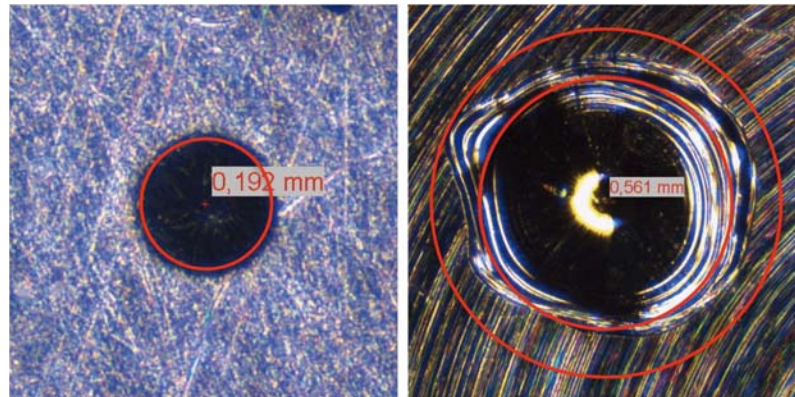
Stereomicroscopic measuring of relevant diameters. Left: 3-point circle construction for a weld of Material B at 102 W and 1.2 ms. Right: Centre point detected by vision for a weld of Material A at 800 W and 1.4 ms.
